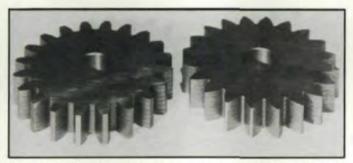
Hobbed 4-DP, 5-in. PD, 20-tooth gears with 20°-PA, left, and 30°-PA,
